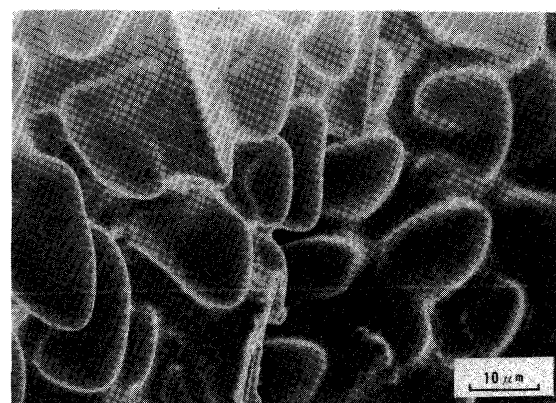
Fractograph of welded joint of Inconel 713C, showing liquation cracking
